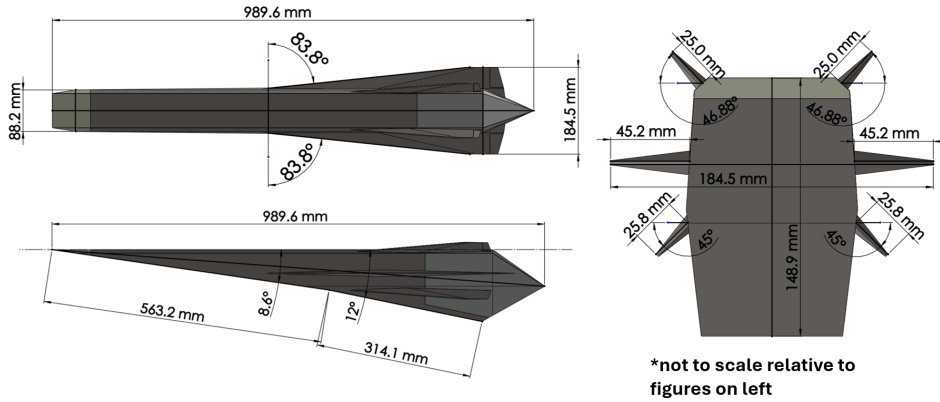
Top, side, and front views of Tachyon with key dimensions
